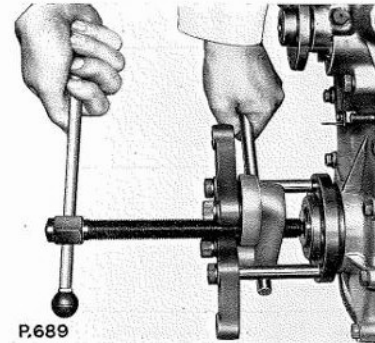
Withdrawing the crankshaft pulley boss, using the Churchill Main Tool 55 in conjunction with the adaptor set R.G.55-8
